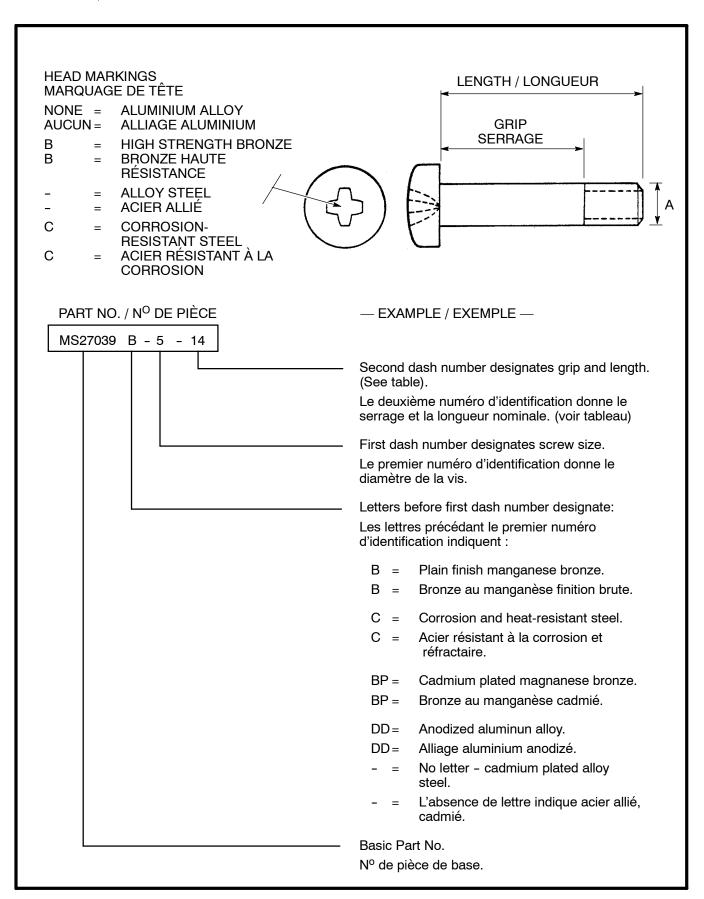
(Sheet 1 of 3) Screw, Machine, Structural, MS27039 Figure 6-8 (feuille 1 of 3) Vis à métaux pour structures, MS27039
